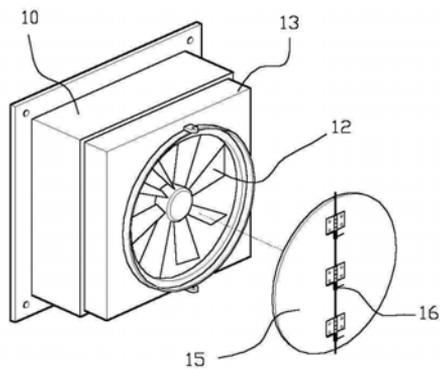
shows an exploded perspective view of a ventilator according to the present device.
